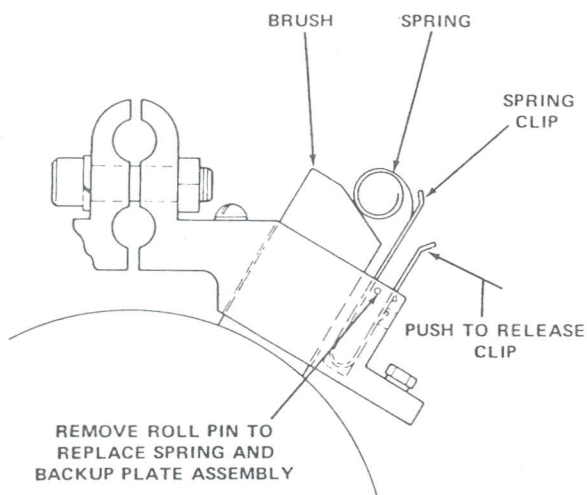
Constant Pressure Brush Assembly, AC Motors
